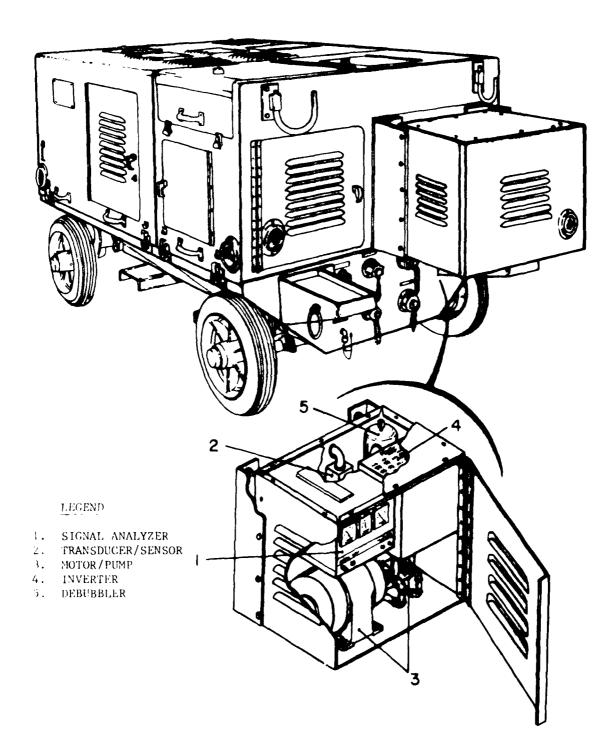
Contamination Monitor Arrangement on AHT-64 Test Stand
